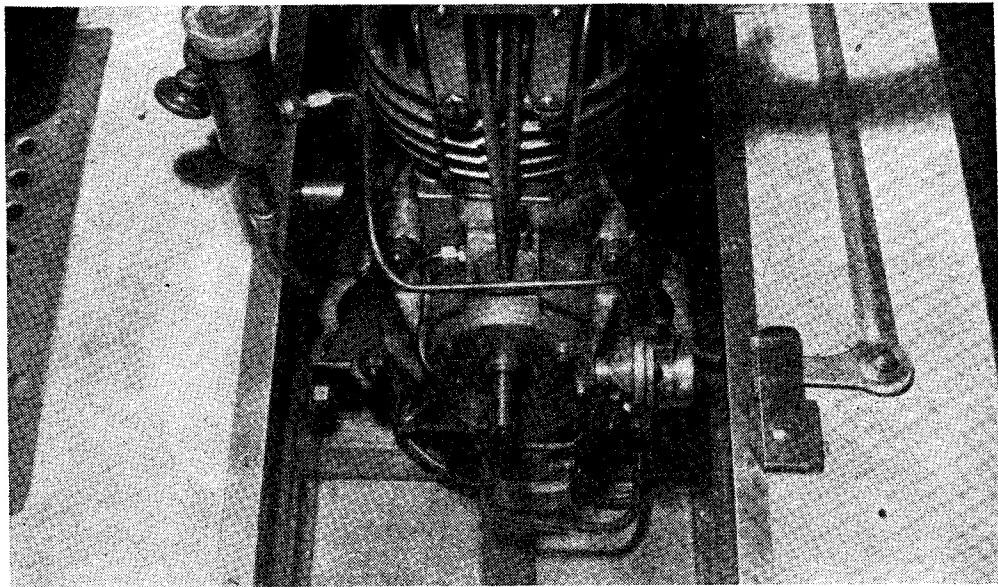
Showing petrol pump, oil pump and feed pipes to valve stems
